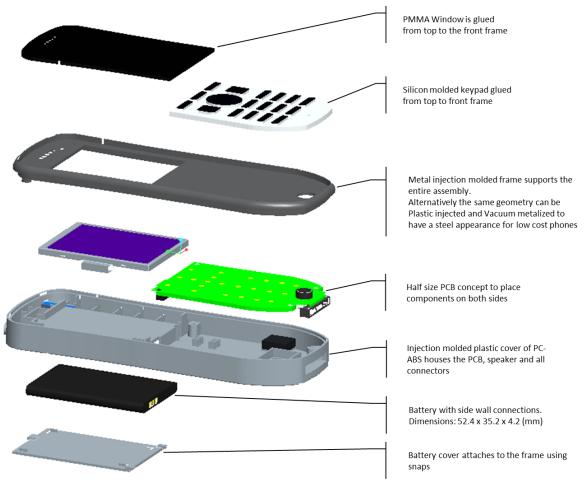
Concept (3) Windy+Mechy exploded view with details
